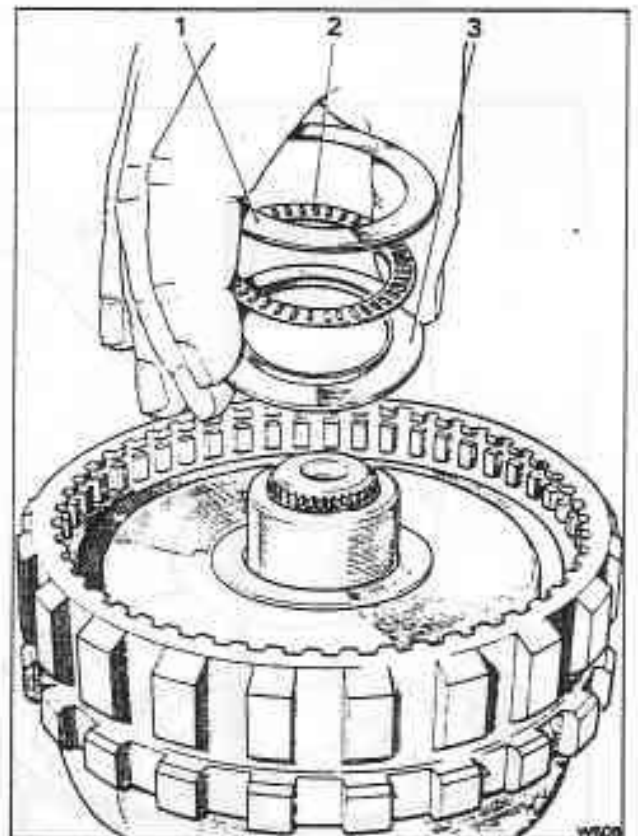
Fitting the races and thrust bearing to the outer face of the rear internal gear
